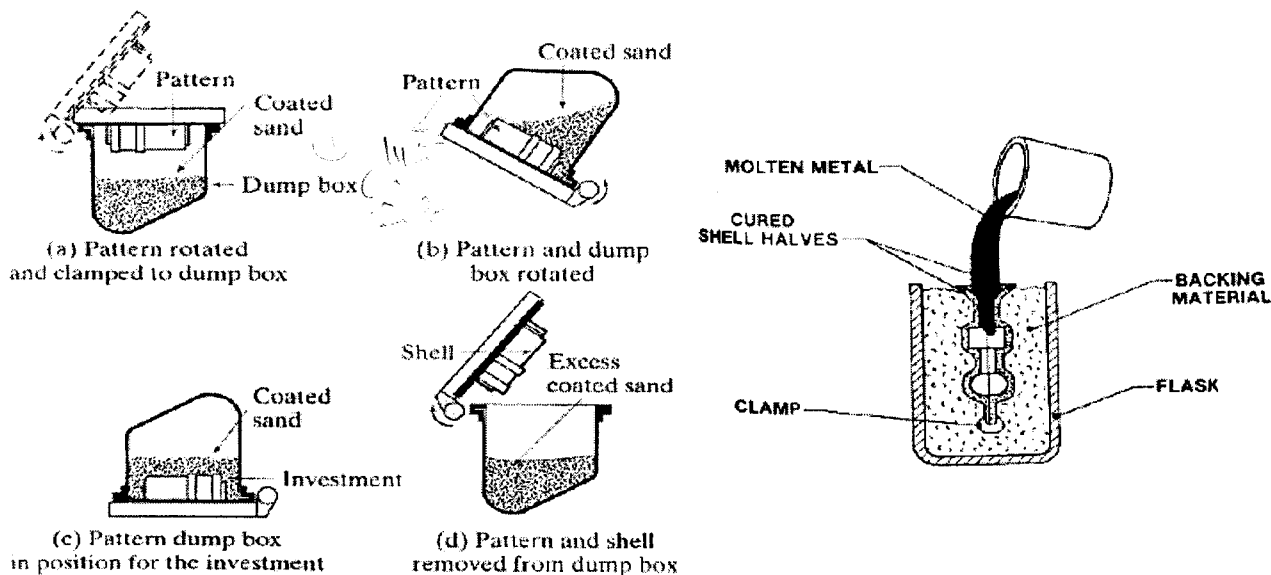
Making the shell-mold [Source: Kalpakjian & Schmid] Figure 6. Shell mold casting
